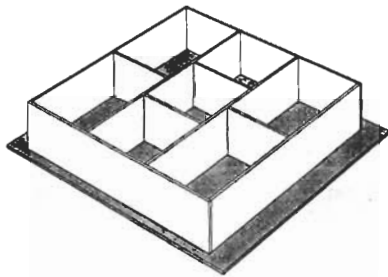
SIMPLE E-FIELD SHIELDS for radio-frequency hacker projects are easily built up from pieces of double-sided printed circuit board stock.
